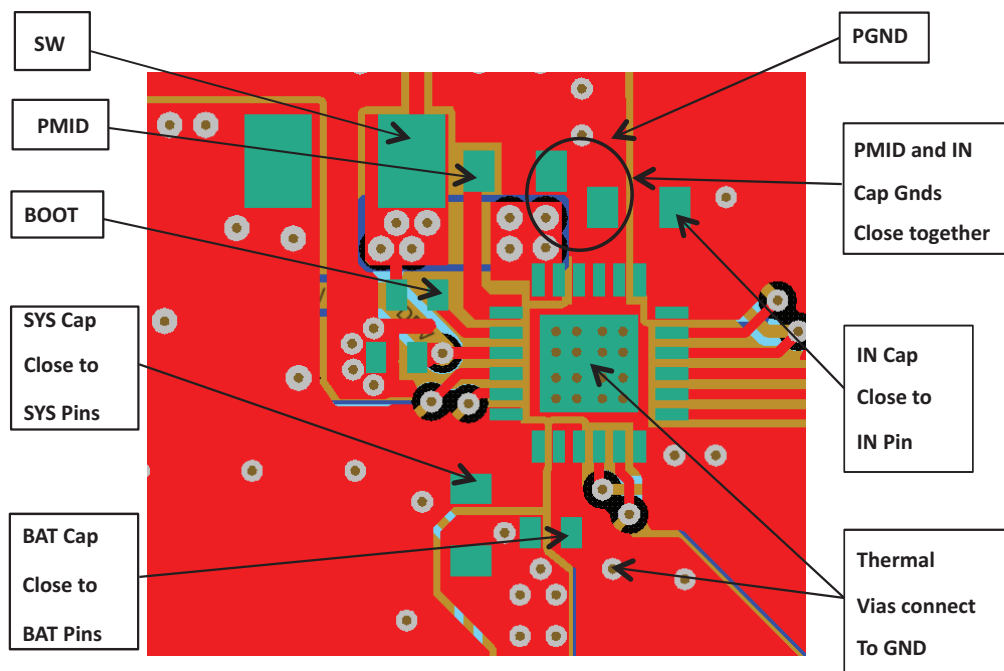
Recommended bq2426x PCB Layout for QFN Package
